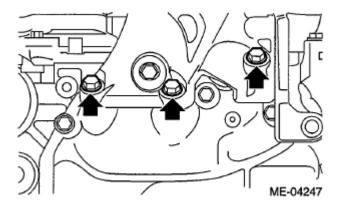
Locating Engine Mounting Courtesy of SUBARU OF AMERICA, INC.
